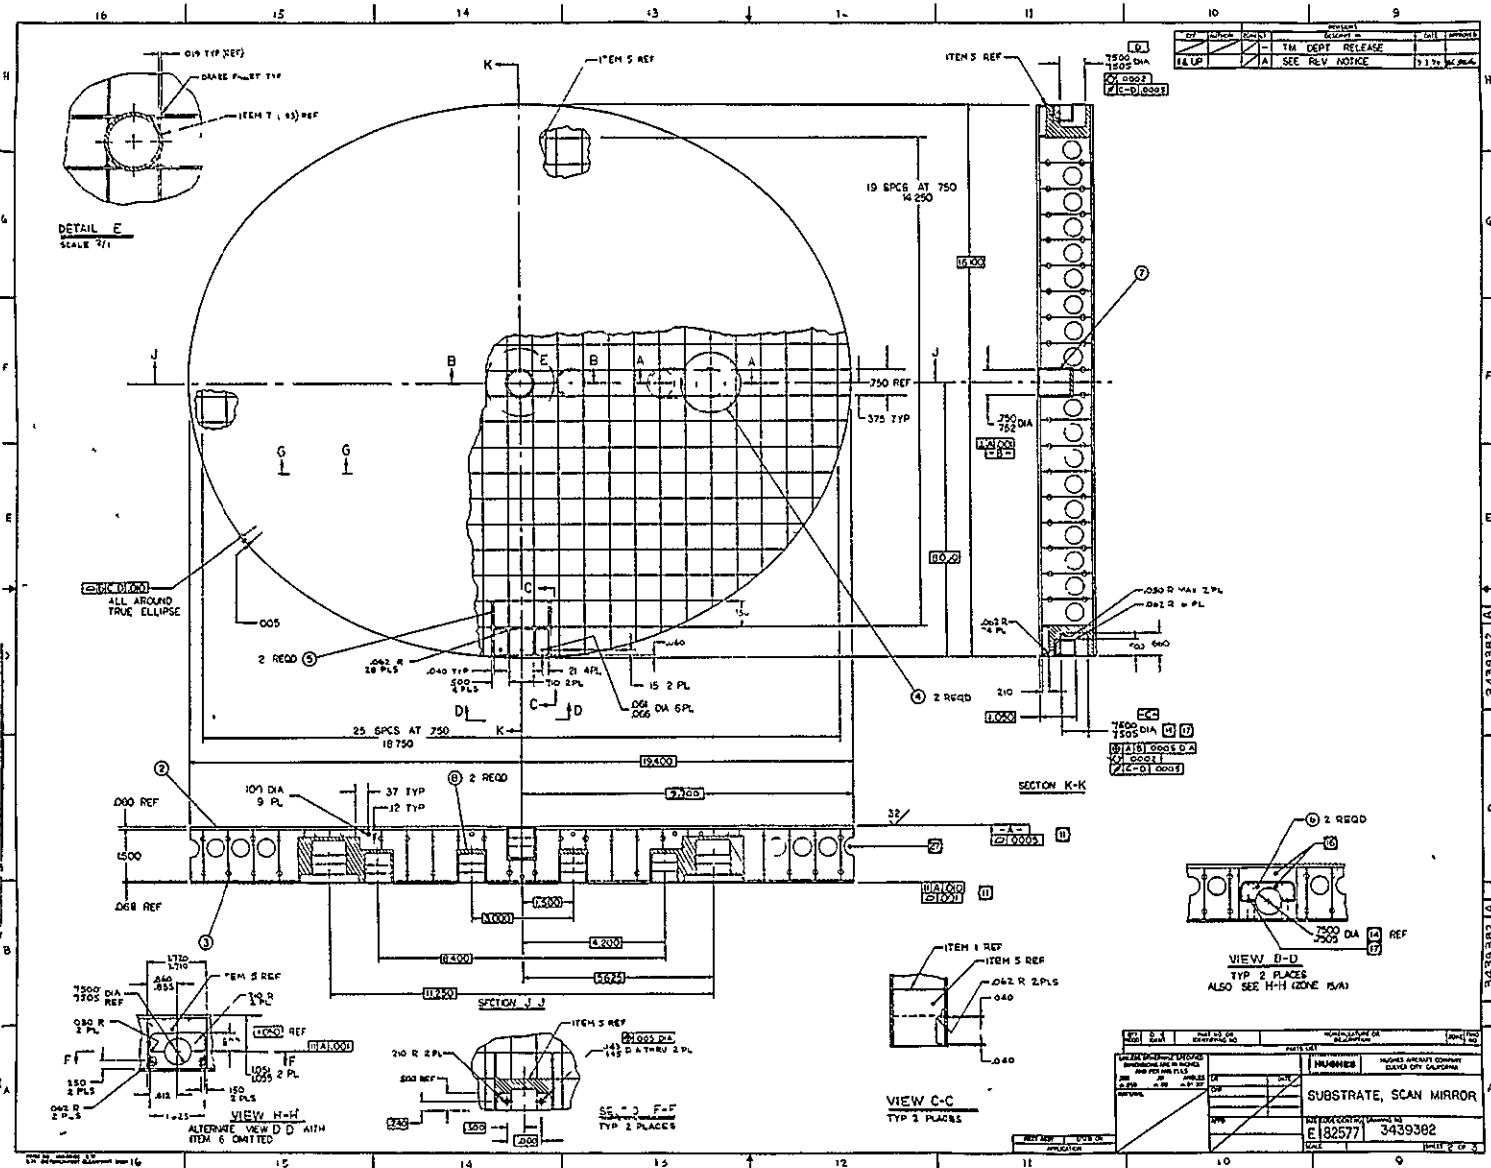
Mirror blank drawing. (Sheet 2 of 3)
